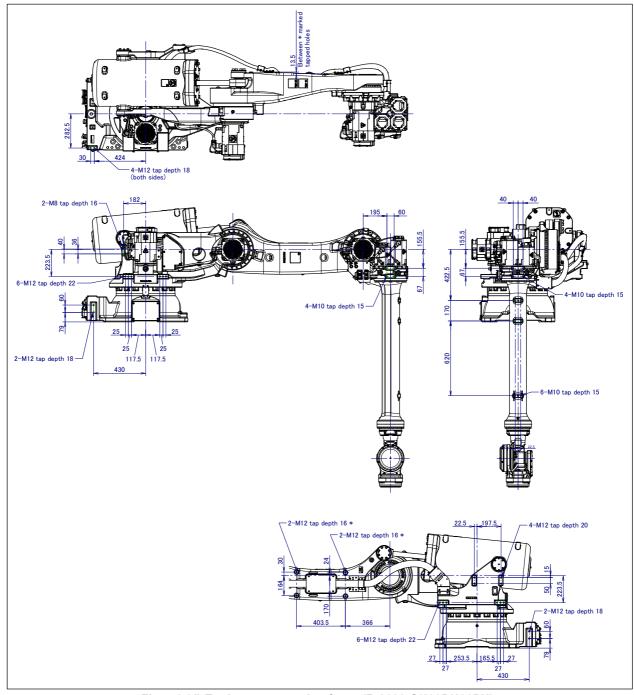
(d) Equipment mounting faces (R-2000iC/100P/100PH)
